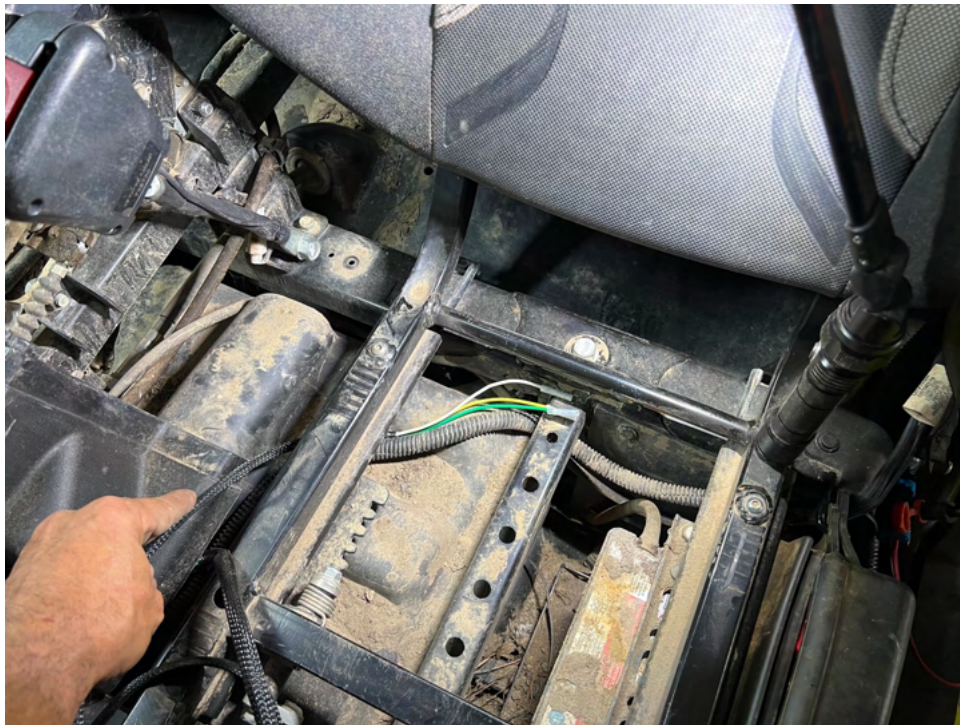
FIGURE SHOWING REAR HARNESS COMING OUT TO REAR BEHIND DRIVER'S SEAT
